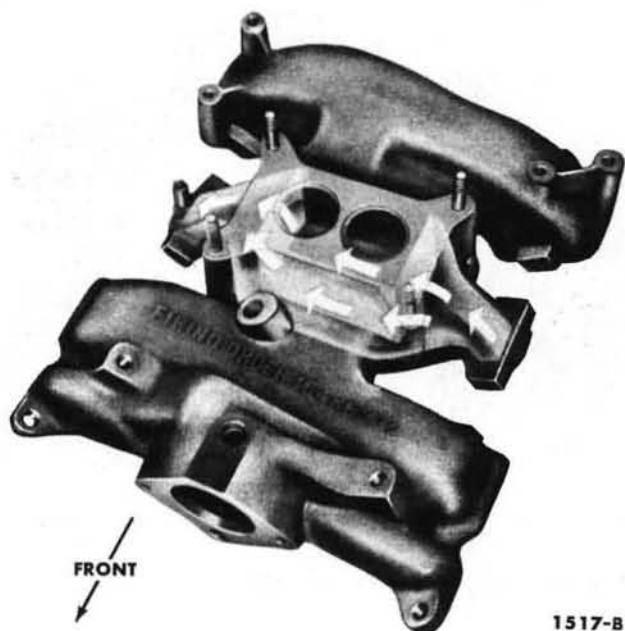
Intake Manifold Exhaust Gas Passage—Typical
